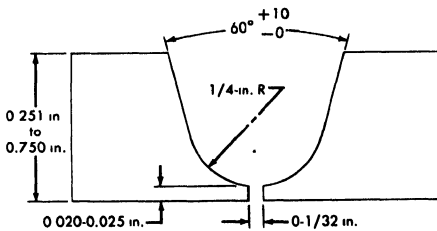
Typical setup of HRE-2 core tank Zircaloy-2 weldment.
